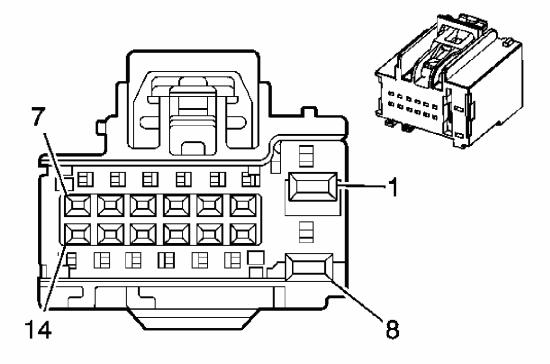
Radio C1 Connector End View Courtesy of GENERAL MOTORS CORP.
